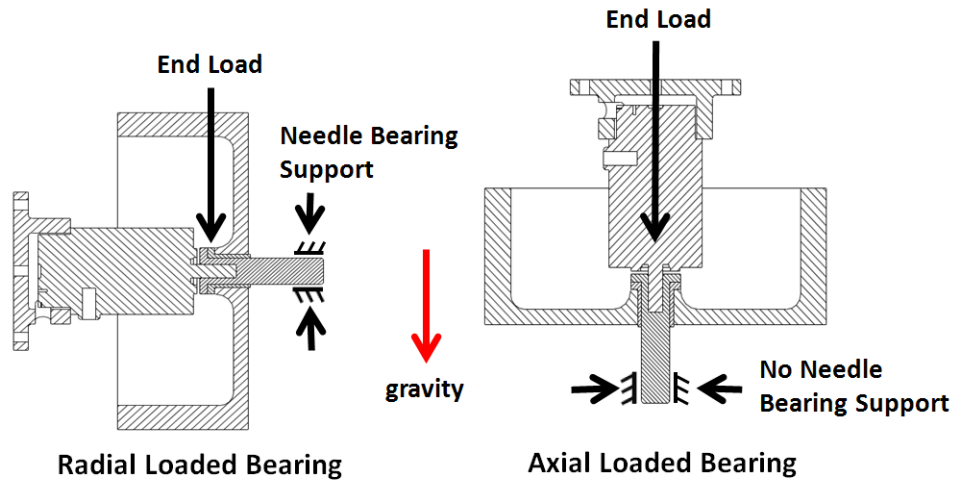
Radial and axial loading of the Andrews shaft configuration (After [59])
